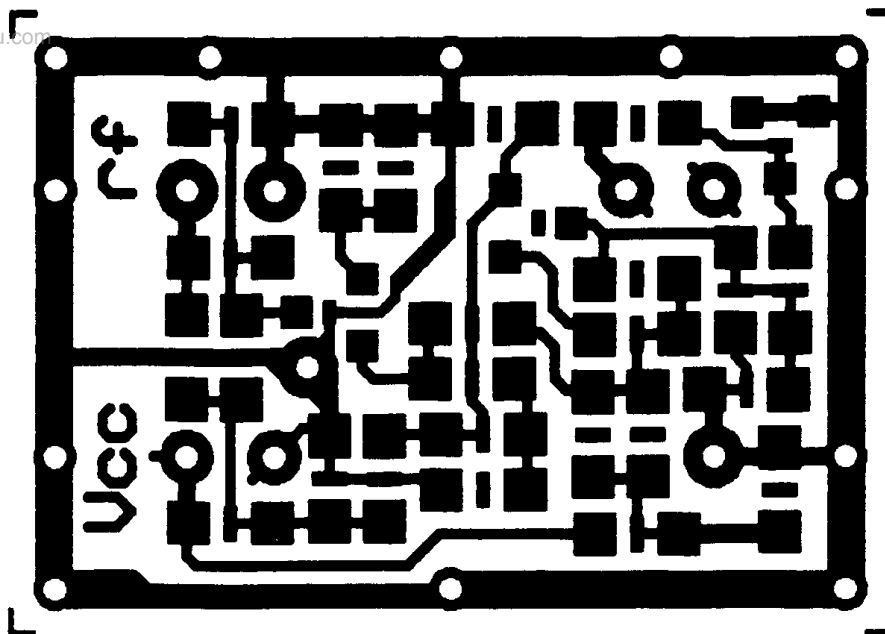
Auxiliary 100MHz VCO PCB Layout and Placement of Components
